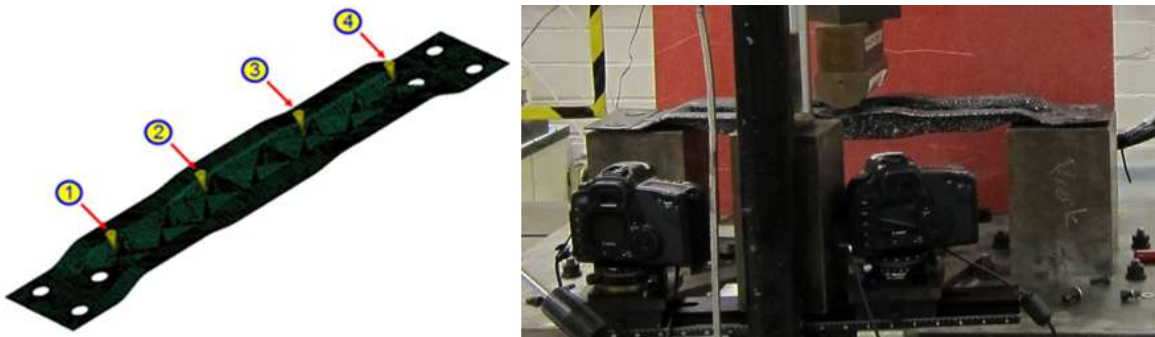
Injection gate location of structural beam (left) and structural beam flexure test set up (right)
